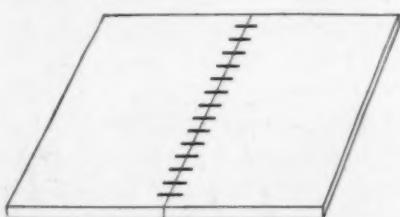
Light Plate Prepared for Welding by Notching
